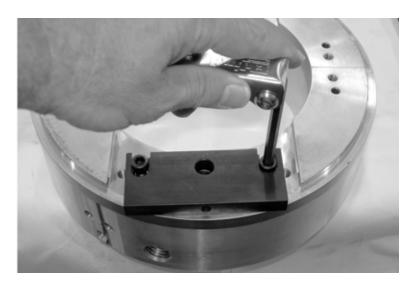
Install the bearing fixture plate on the rotating ring at the slide mounting position.
